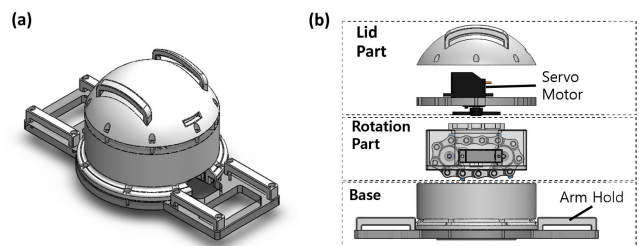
(a) A CAD design of a skin-stretch module. (b) The assembly of the skin-stretch module.
